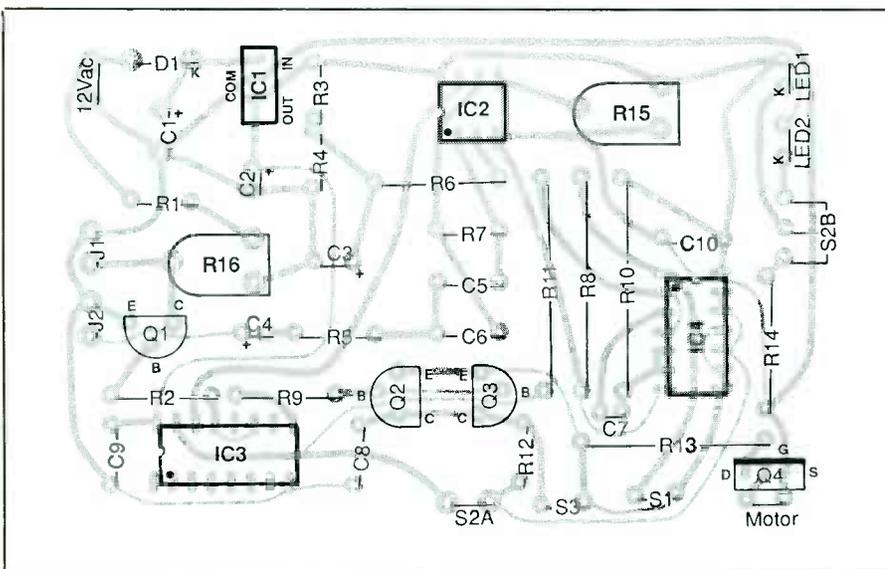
Wiring guide for pc board. Use this as rough layout for components when using perforated-board assembly.
